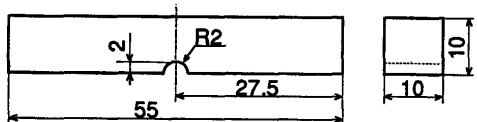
Schematic drawing of the bending test specimen. Dimensions in millimeters.
